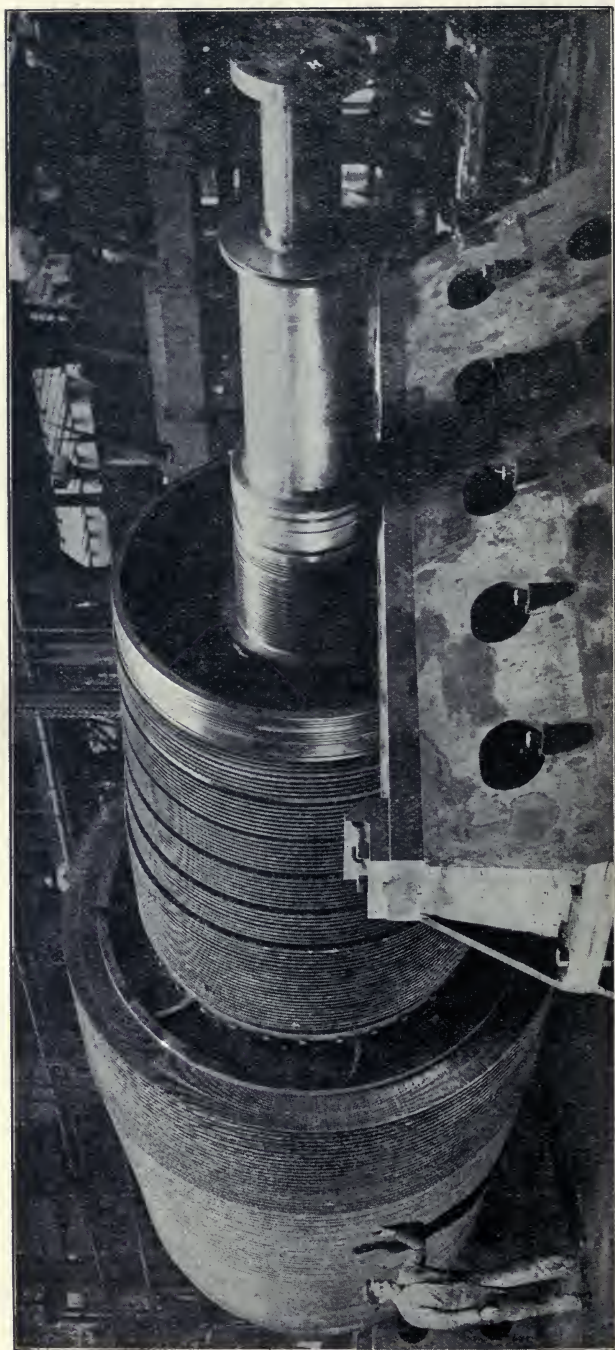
L. P. AND ASTERN ROTOR BEING BALANCED ON KNIFE EDGES (TURBINES OF "CARMANIA").
